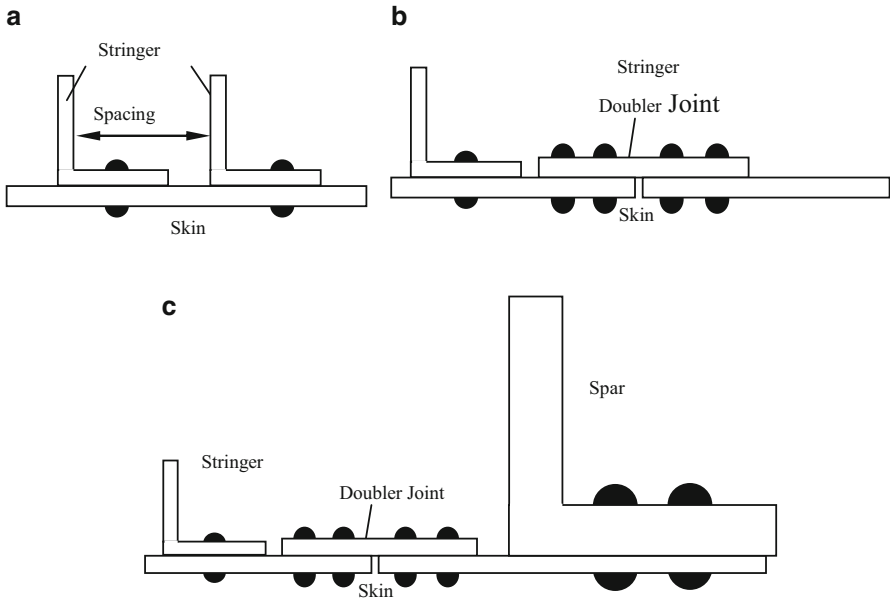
Skin assembly. (a) Skin-stiffening. (b) Skin-joint. (c) Skin-to-structure
